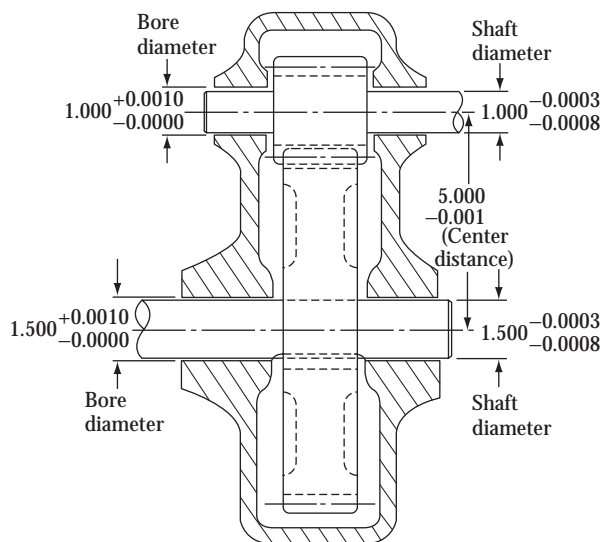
Spur or helical gears operated in bearings bored in the gear casing exhibit the simplest case of tolerance buildup on center distance.
